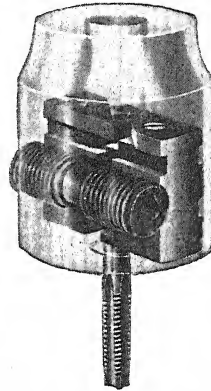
The Skinner Positive-Drive Tapping Chuck.
